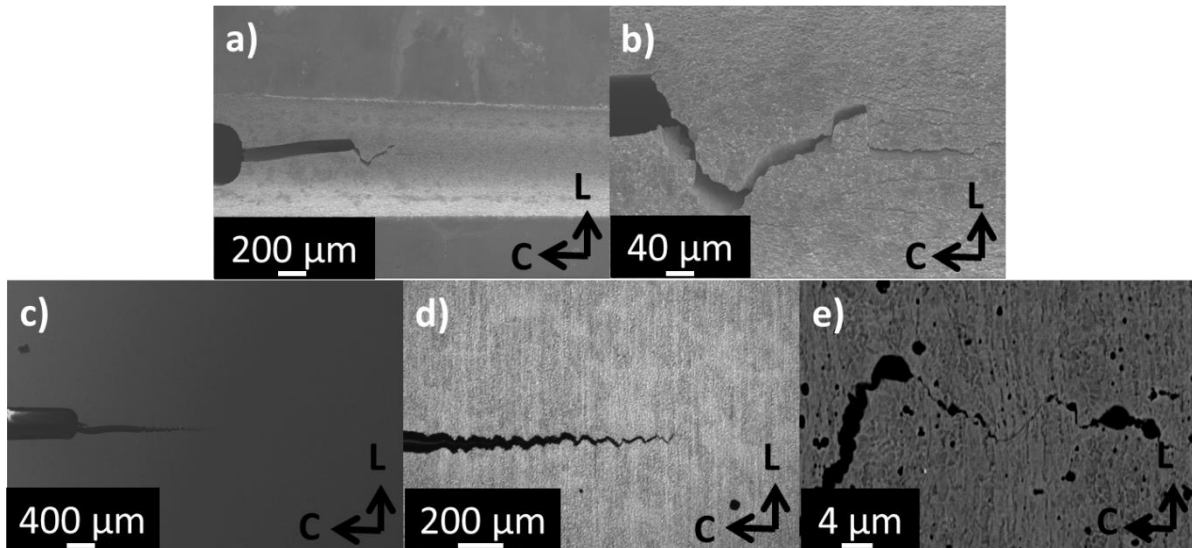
Side view of the propagated crack close to the specimen surface after fracture toughness testing (a and b) and close to the crack front middle after sectioning and etching (c-d) in the L-C orientation of ODS-CSM at 400 °C.
